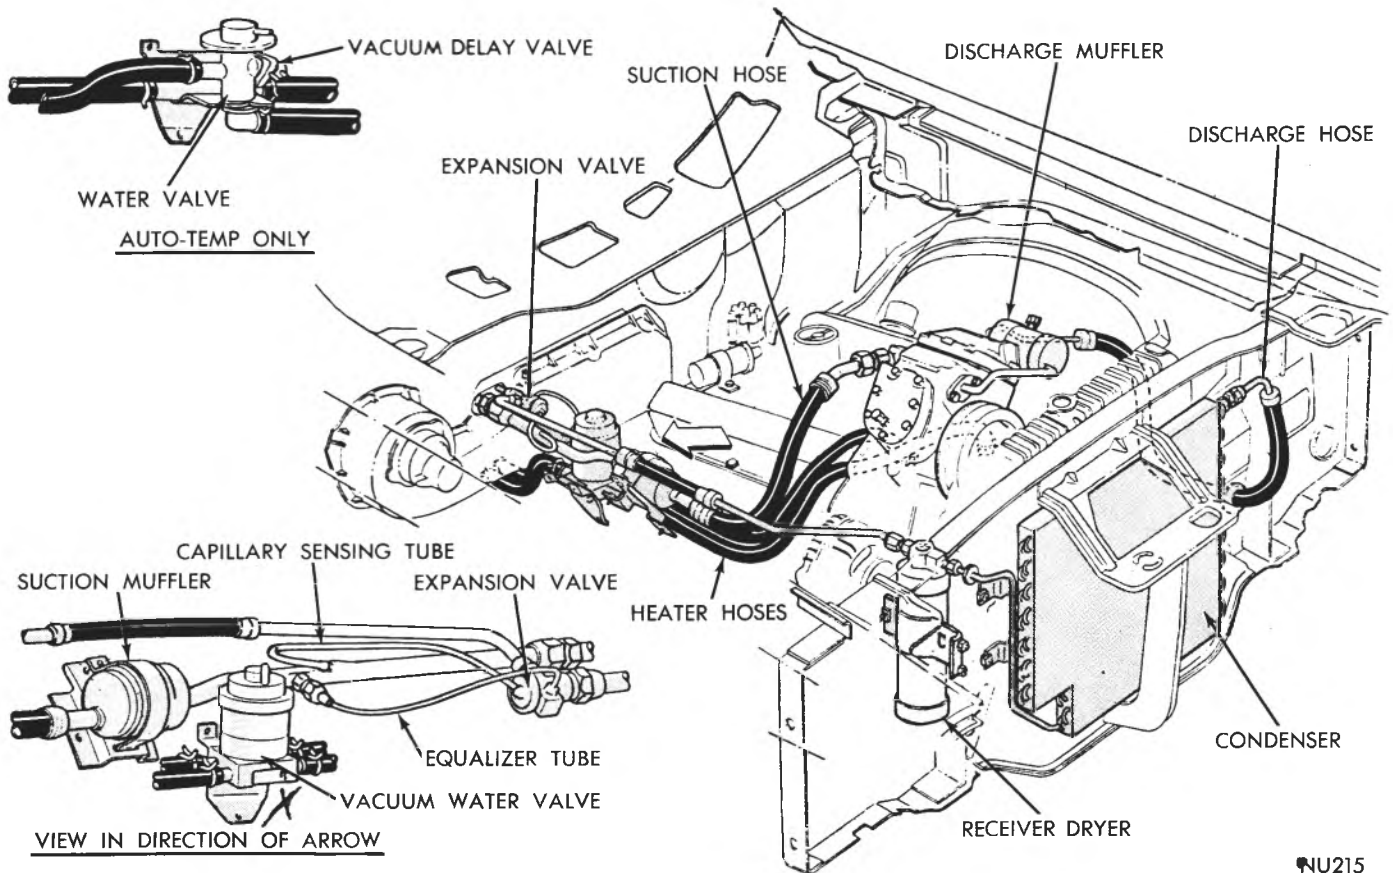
Air Conditioning and Heater Plumbing—273 and 318 Engines
